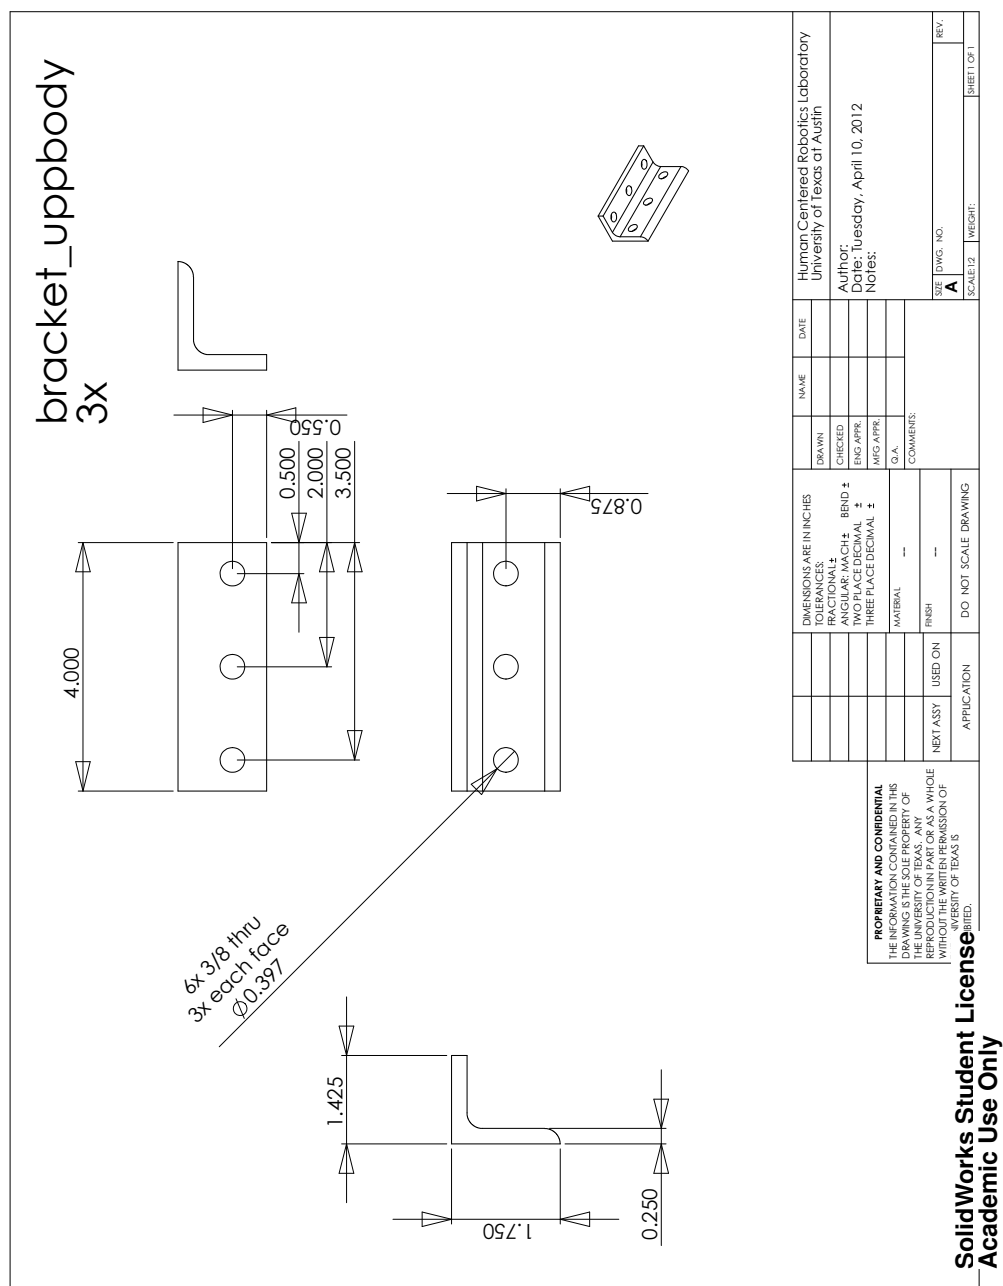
Assembly of the following Meka upper body attachment fixtures.
